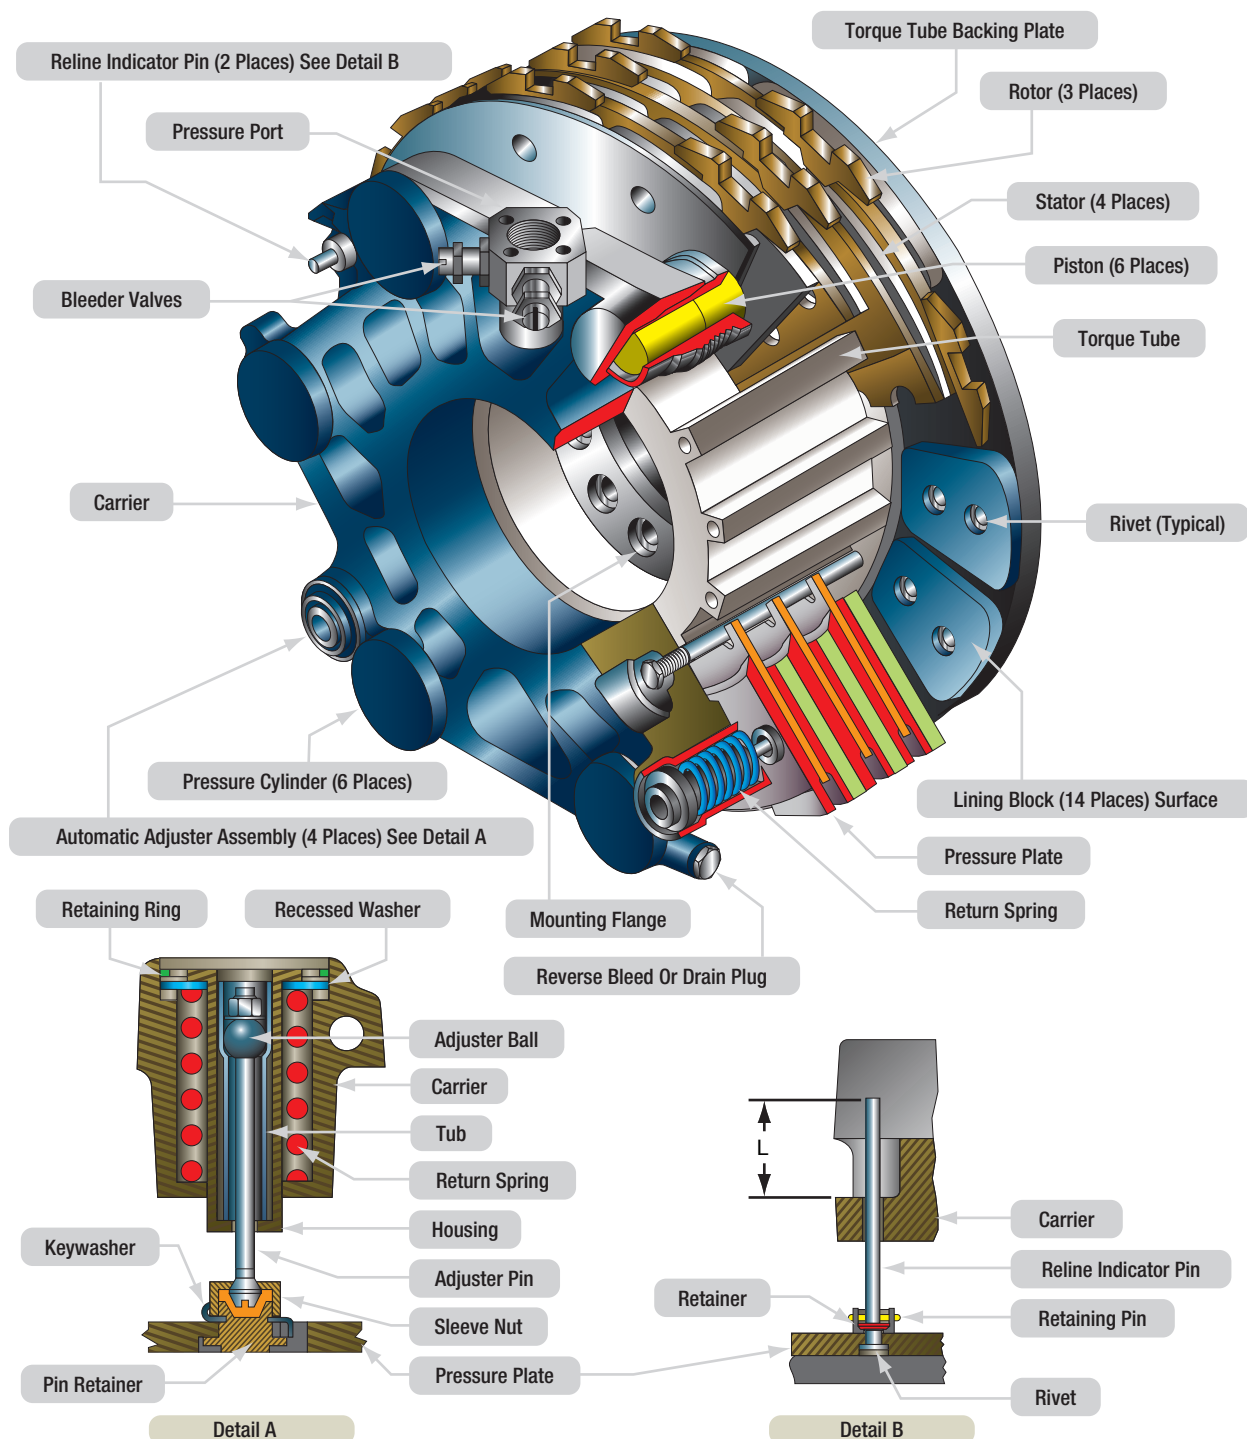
The multiple-disk brake assembly and details from a Boeing 737.
